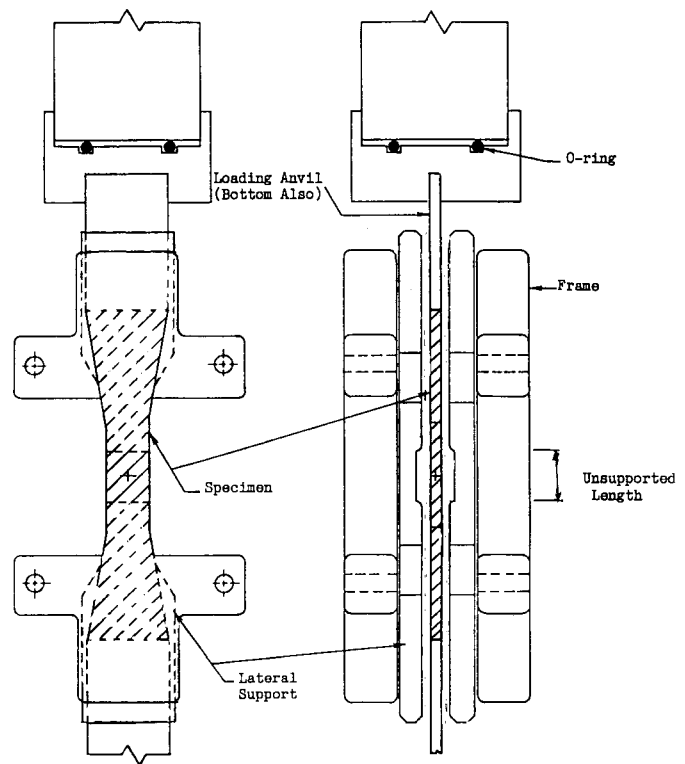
Example of a Controlled Face Supported Fixture (4)
